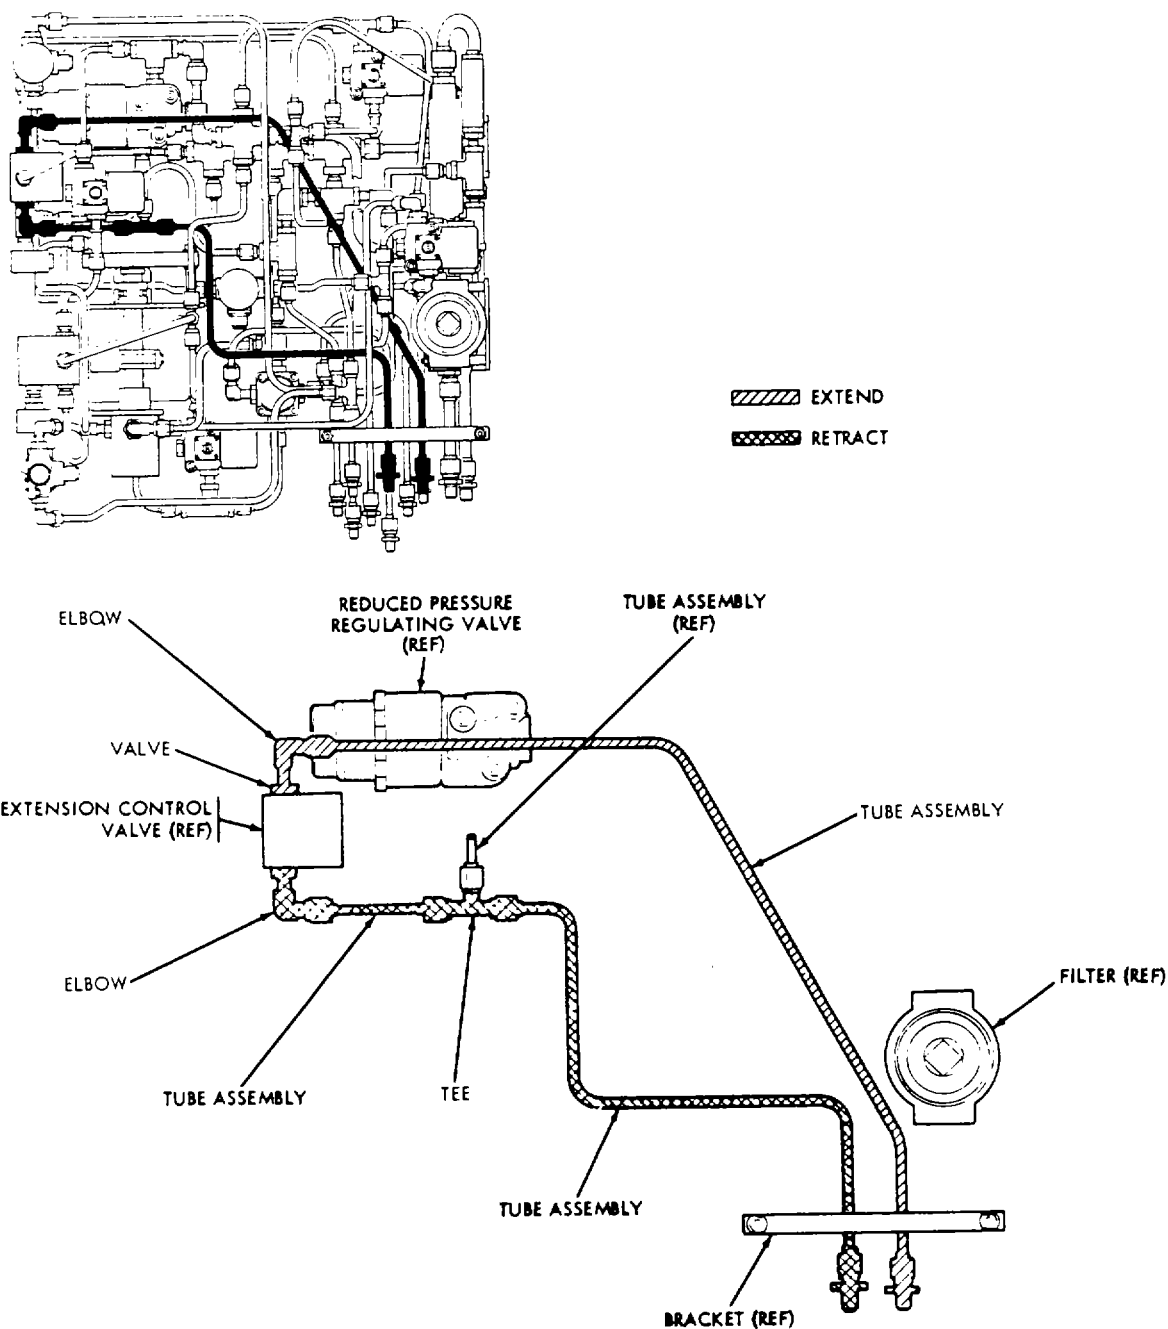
Hydraulic Control Console - Extension System Flow Diagram.
